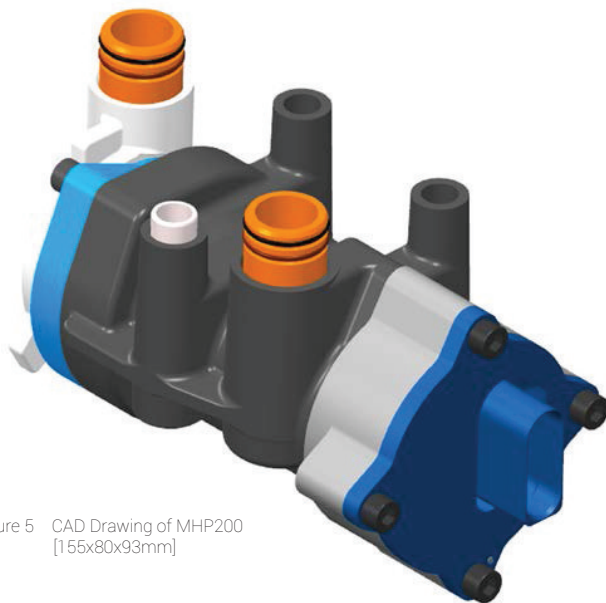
CAD Drawing of MHP200 [155x80x93mm]
